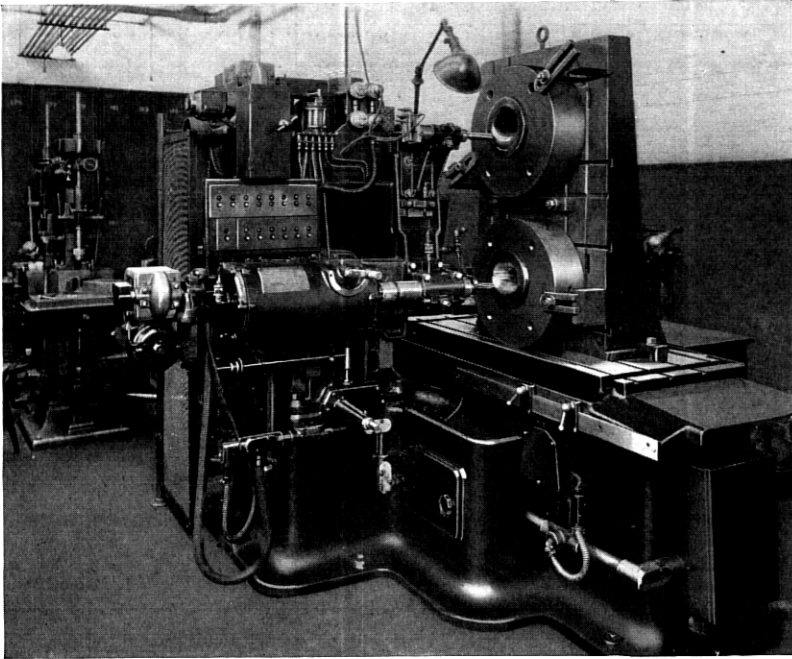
Milling on die sinking machine the contour of die block for sheathing lead-covered cable
